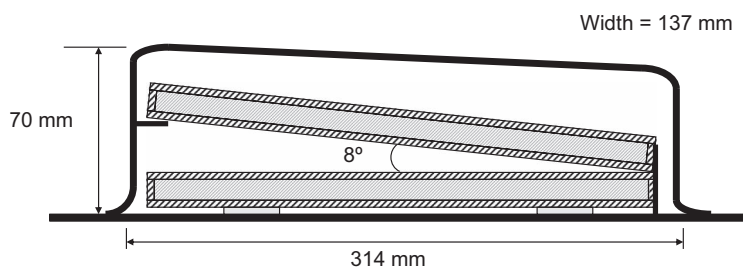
Early Soviet ERA twin-tri-plate assembly.
